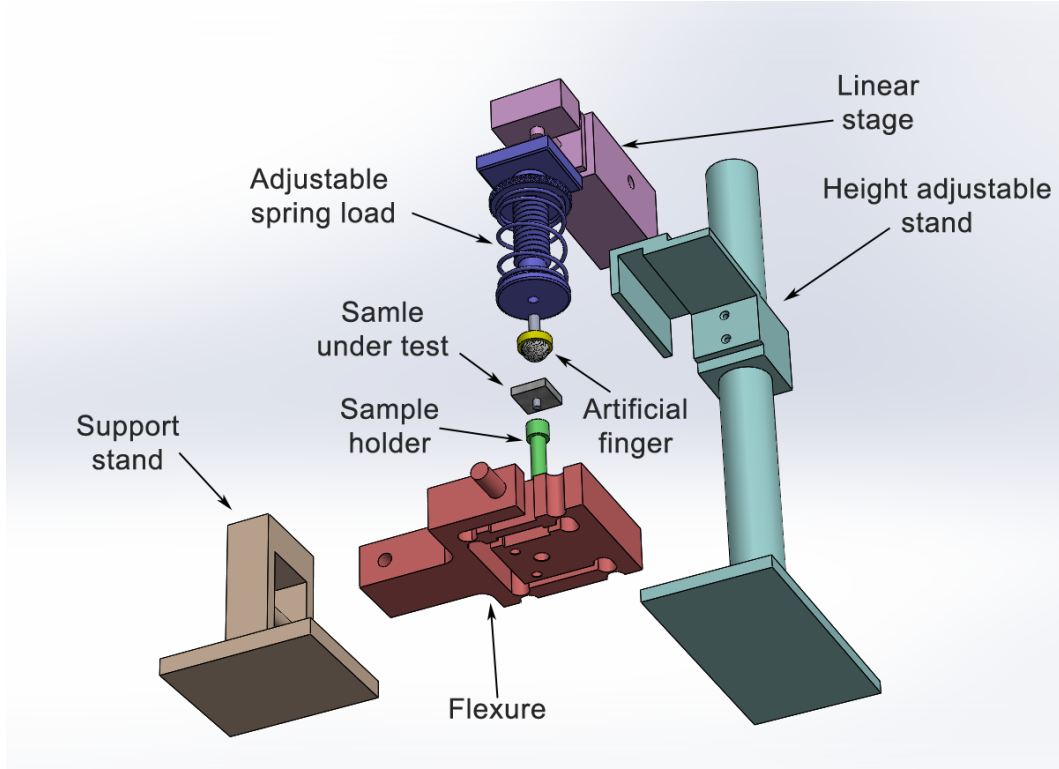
Exploded view of the whole apparatus in SolidWorks from below
